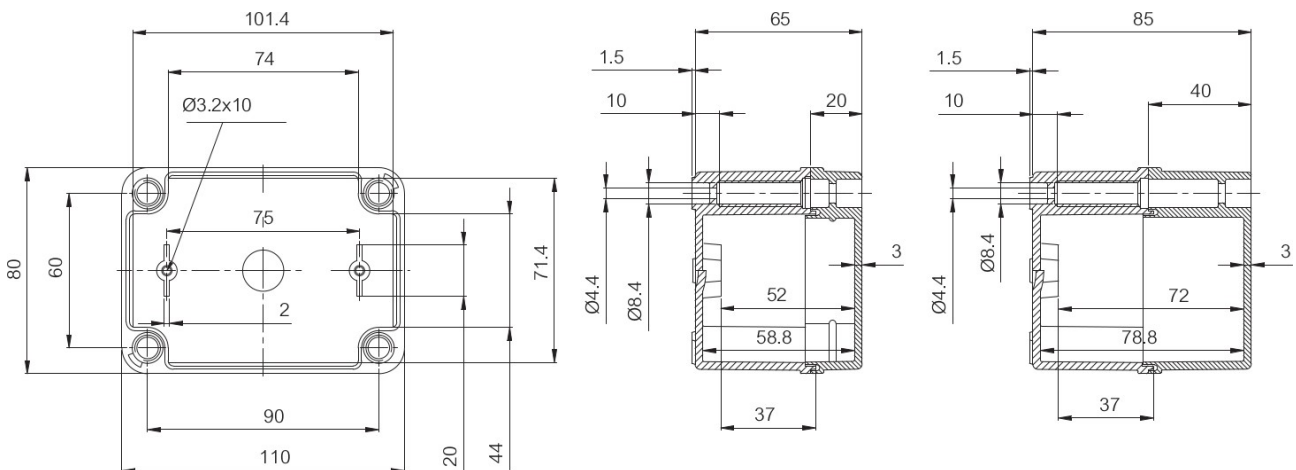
Housing dimensions. Note: Drawing not including cable gland. Dimensions in mm.
